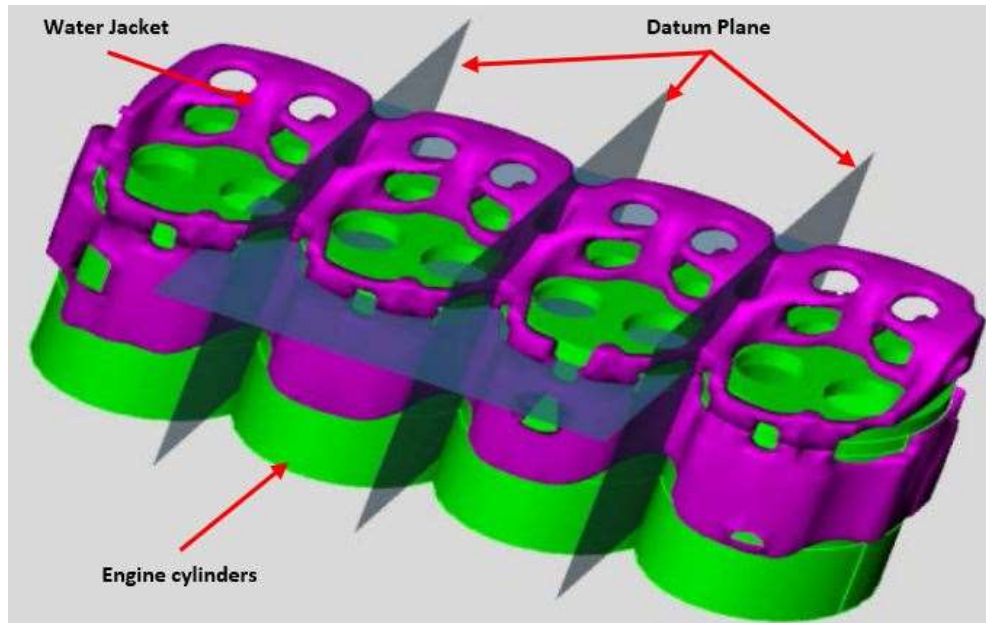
Coupling between cylinders and coolant jacket in the pre-processing tool by Millo [94].
